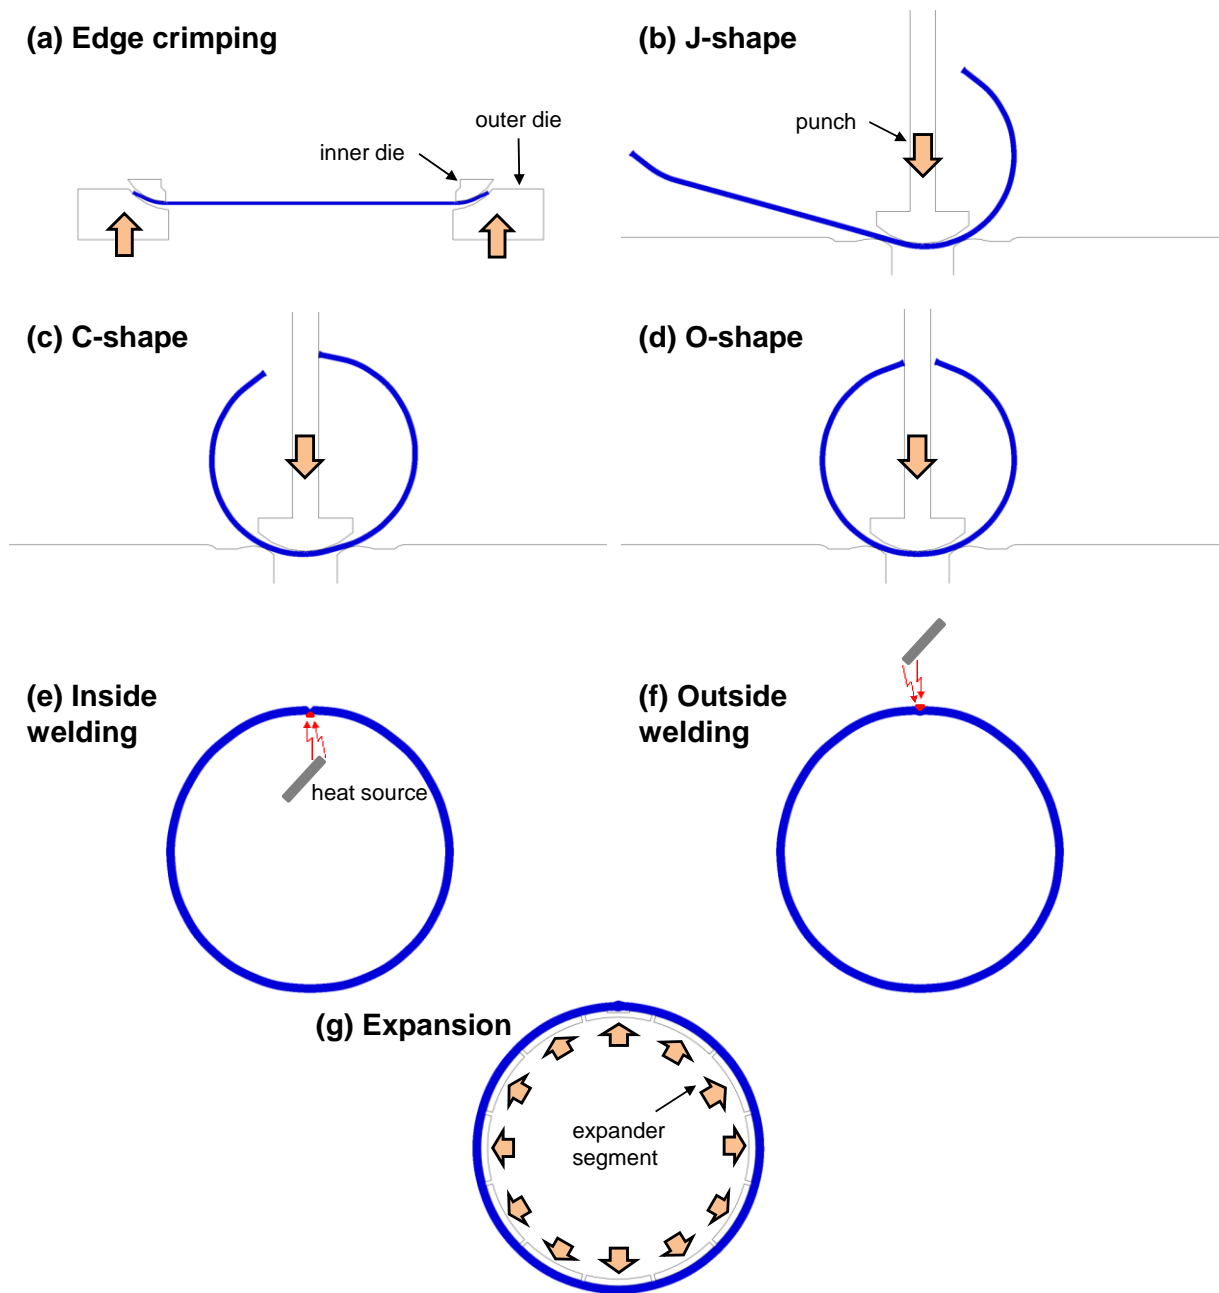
Schematic representation of the JCO-E manufacturing process; (a) Crimping, (b) J-phase, (c) C-phase, (d) O-phase, (e) Inside welding, (f) Outside welding, (g) Expansion.
